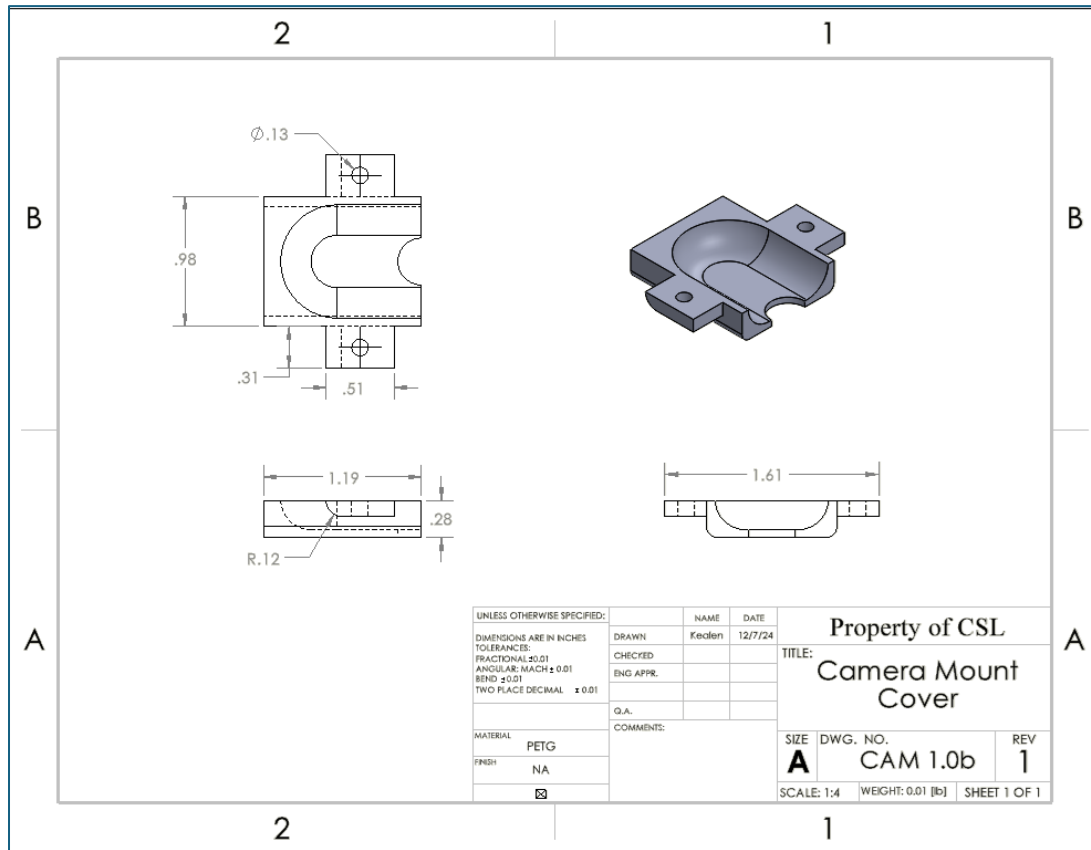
Drawing of the Camera Mount's Upper Portion with critical dimensions.
